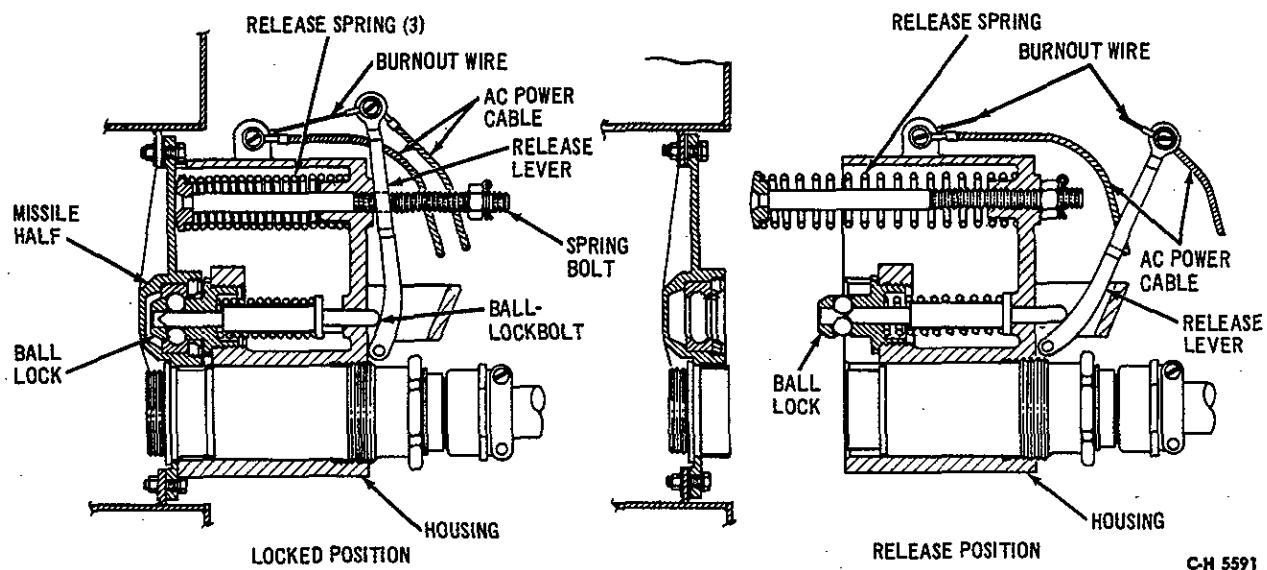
Original Ball Lock Burnout Wire Release Mechanism
